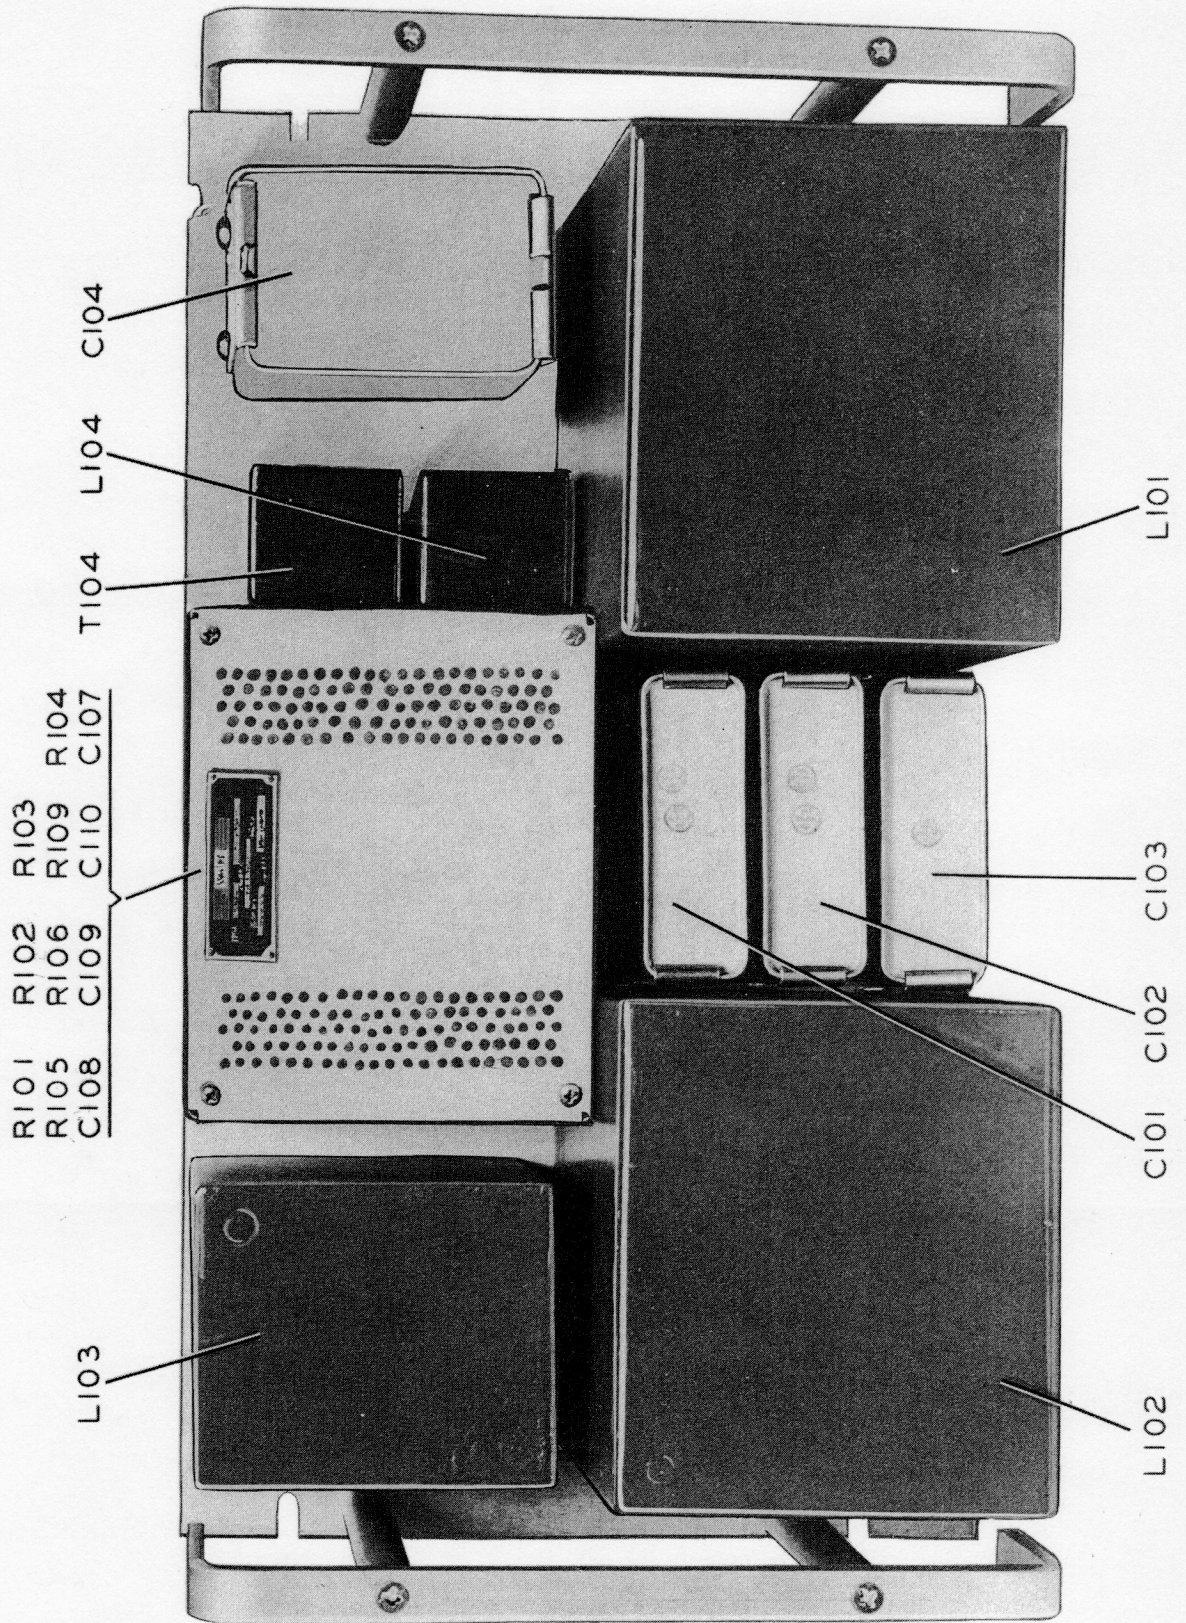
Type 242F-2 Filter and Bias Supply Unit, Front View
